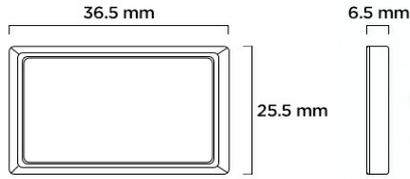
Packaging and dimensions of the CPL-600 filter.
